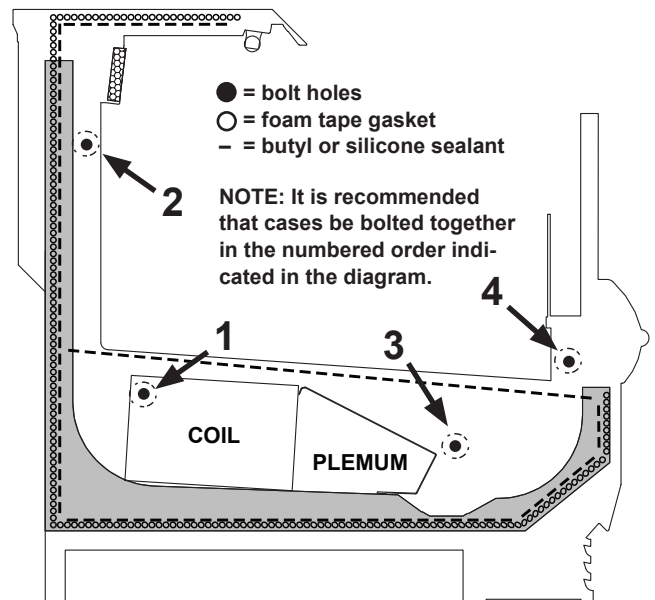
Bolt holes, foam tape gasket and sealant (O2MZD shown. Bolt hole locations in other models may vary.)
